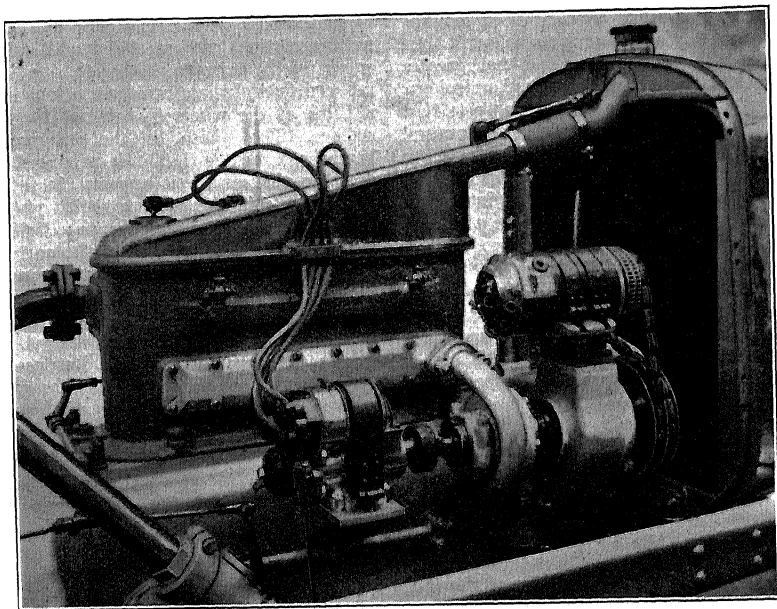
Illustration of a Motor Car Engine showing method of mounting Driving Magneto.
